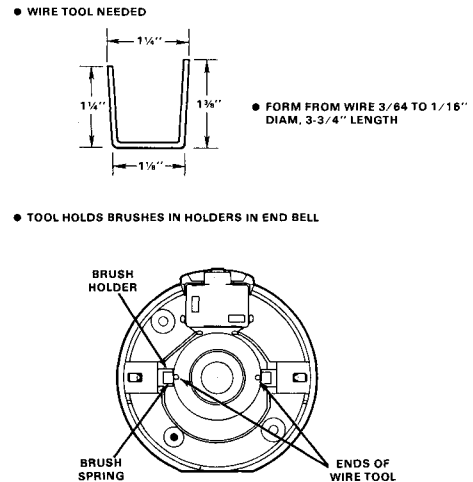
Wire Tool for Assembly Brushes in End Bell Assembly
